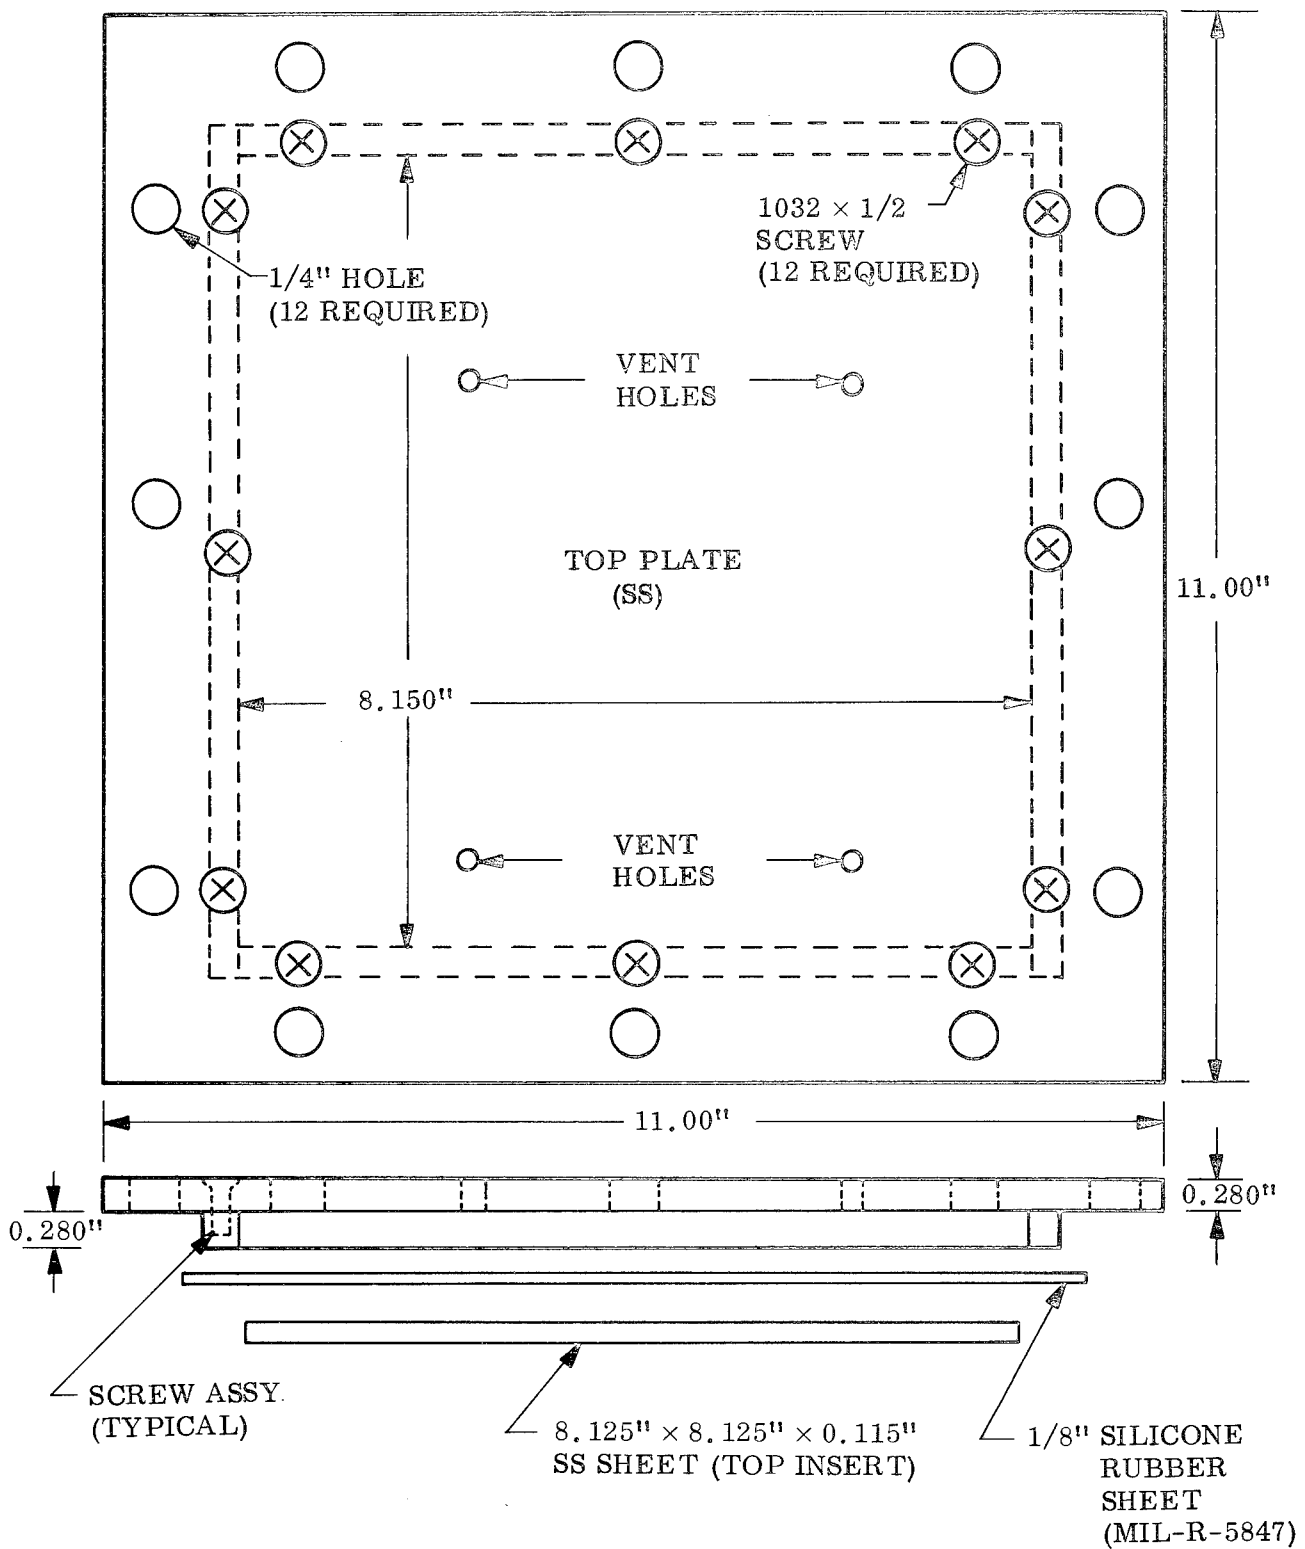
Top Assembly, PBI-Carbon Composite Cure Mold
